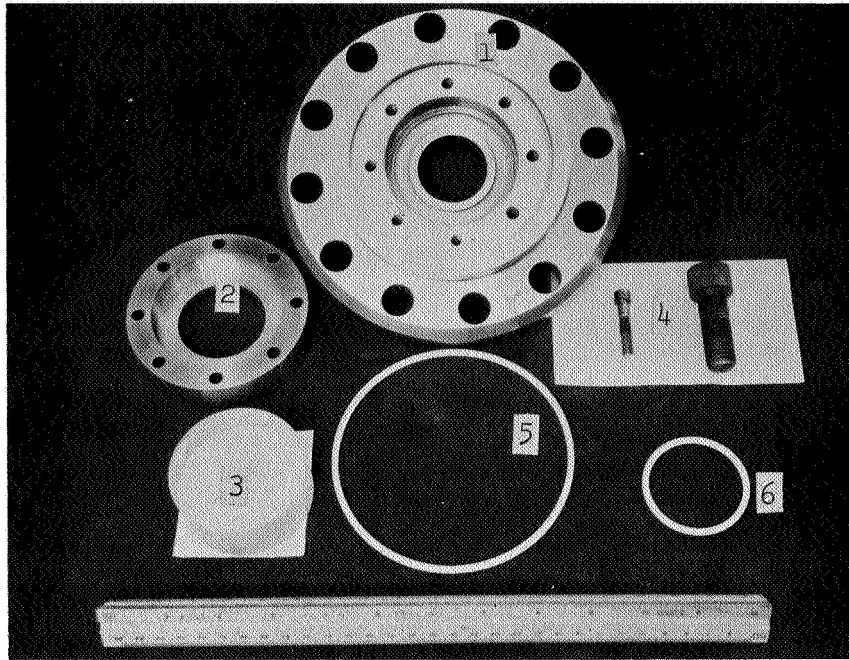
The Components of the Flange Assembly for the High Pressure Vessel
